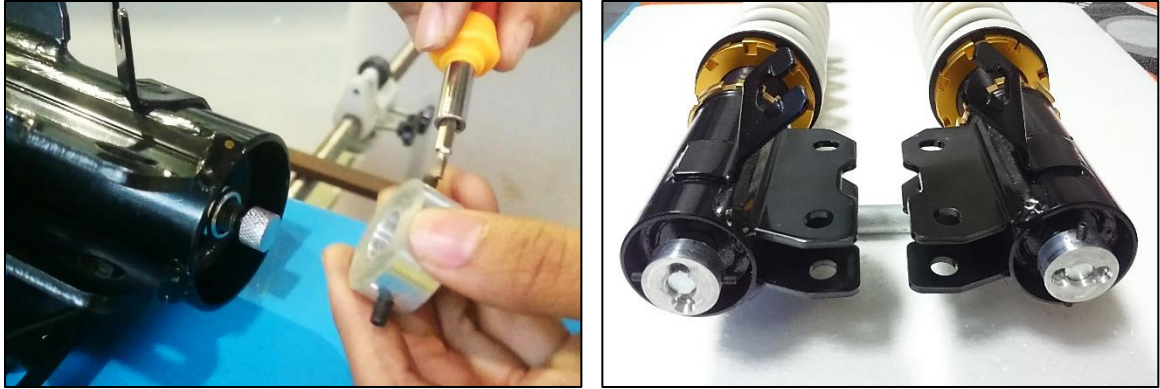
Suspension-Motor Coupling Fabrication and Assembly
